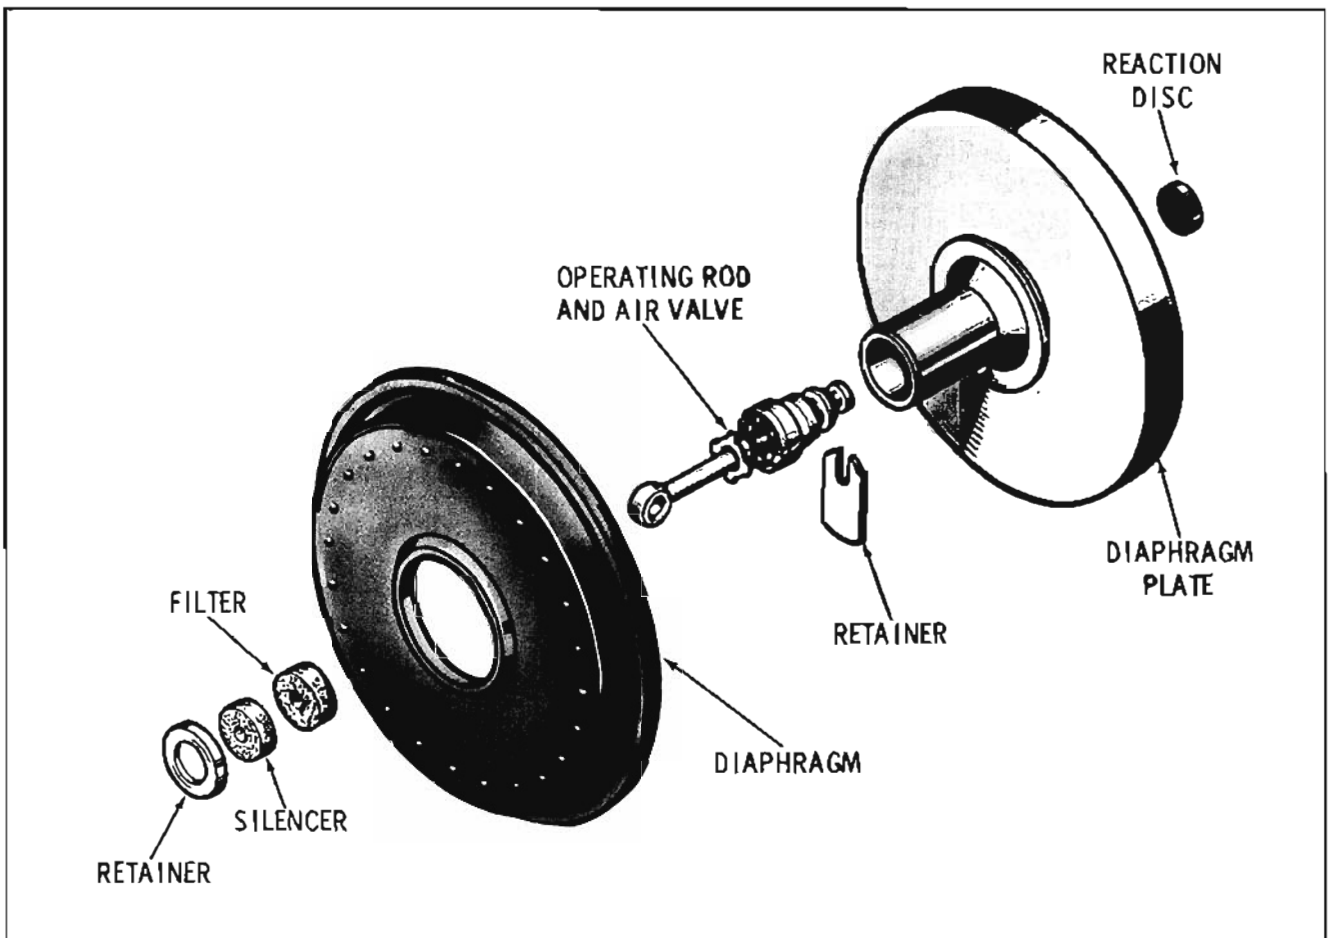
Disassembly of Air Valve and Diaphragm
